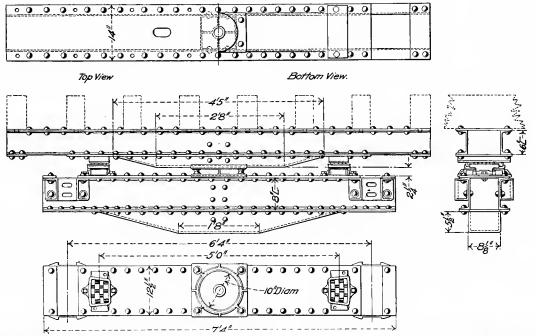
Monitor Body and Truck Bolsters with Creco Side Bearings. Chicago Railway Equipment Company.
